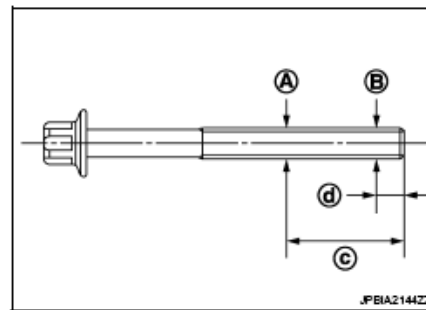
Identifying Cylinder Head Bolts Outer Diameter
